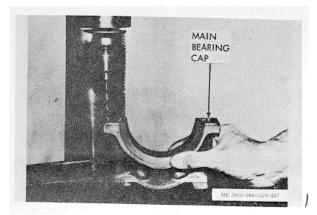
Drilling dowel hole in rear main bearing cap.
